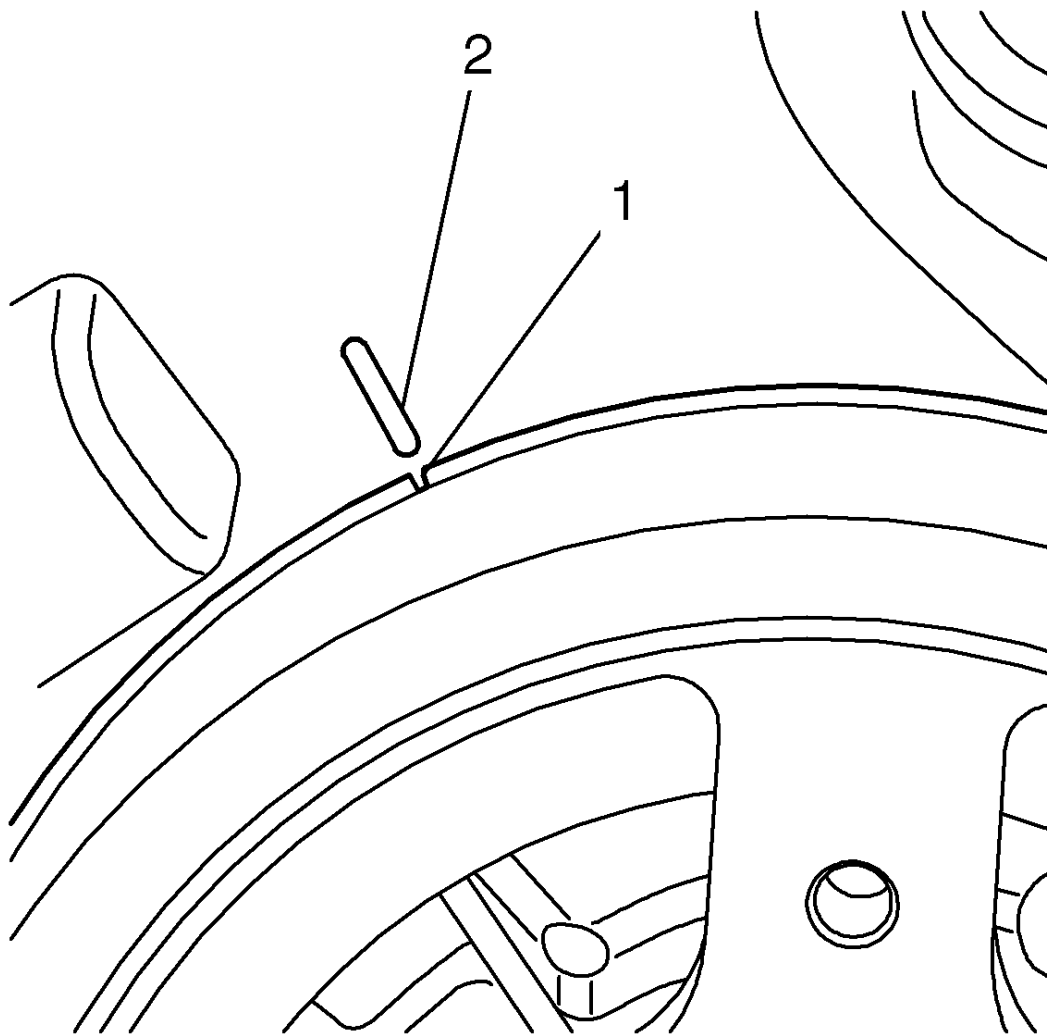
Crankshaft Balancer Mark And Oil Pump Housing Mark
